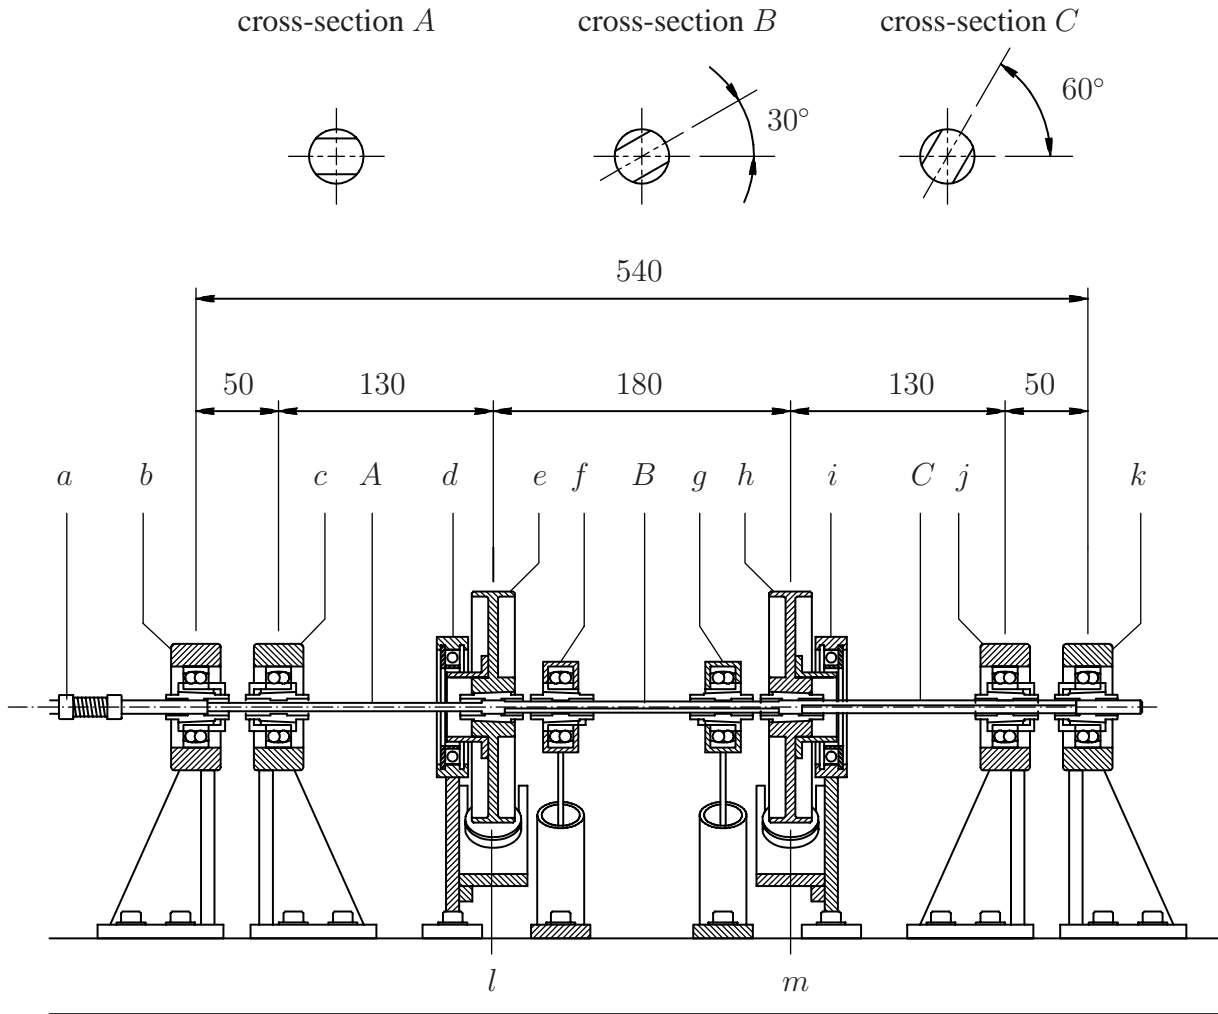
Technical drawing of the rotor prototype in Figure 4.2. Length unit is in millimeter
